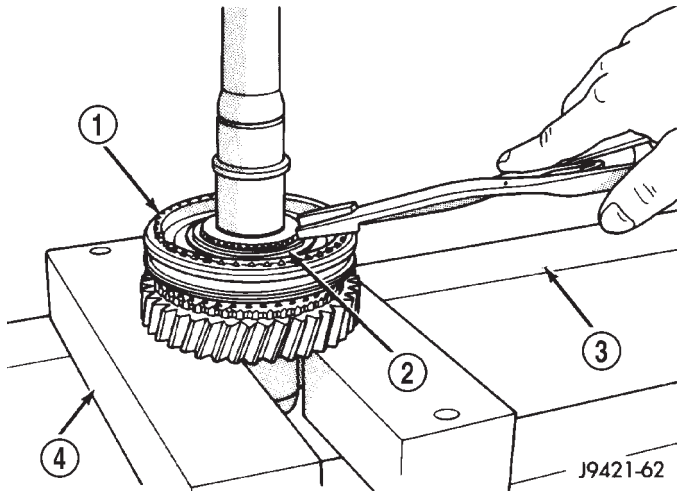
FIFTH-REVERSE SYNCHRO ASSEMBLY
